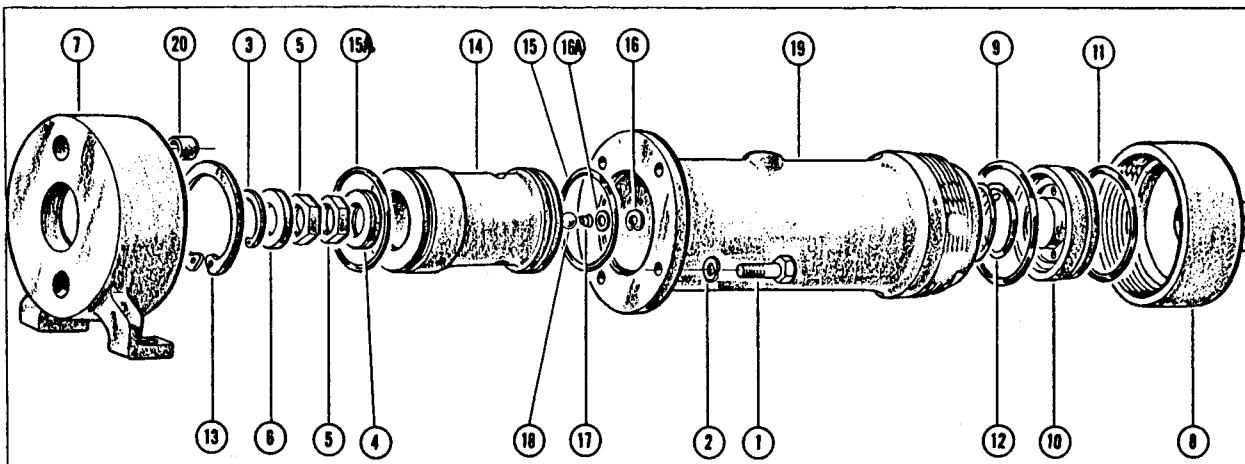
Exploded View, 87-97 Master Cylinder Assembly
